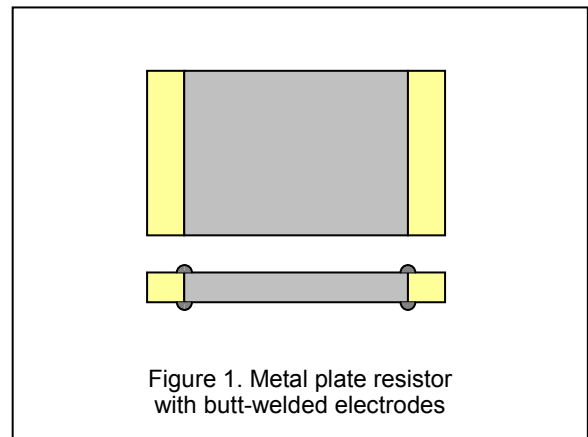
Metal plate resistor with butt-welded electrodes
